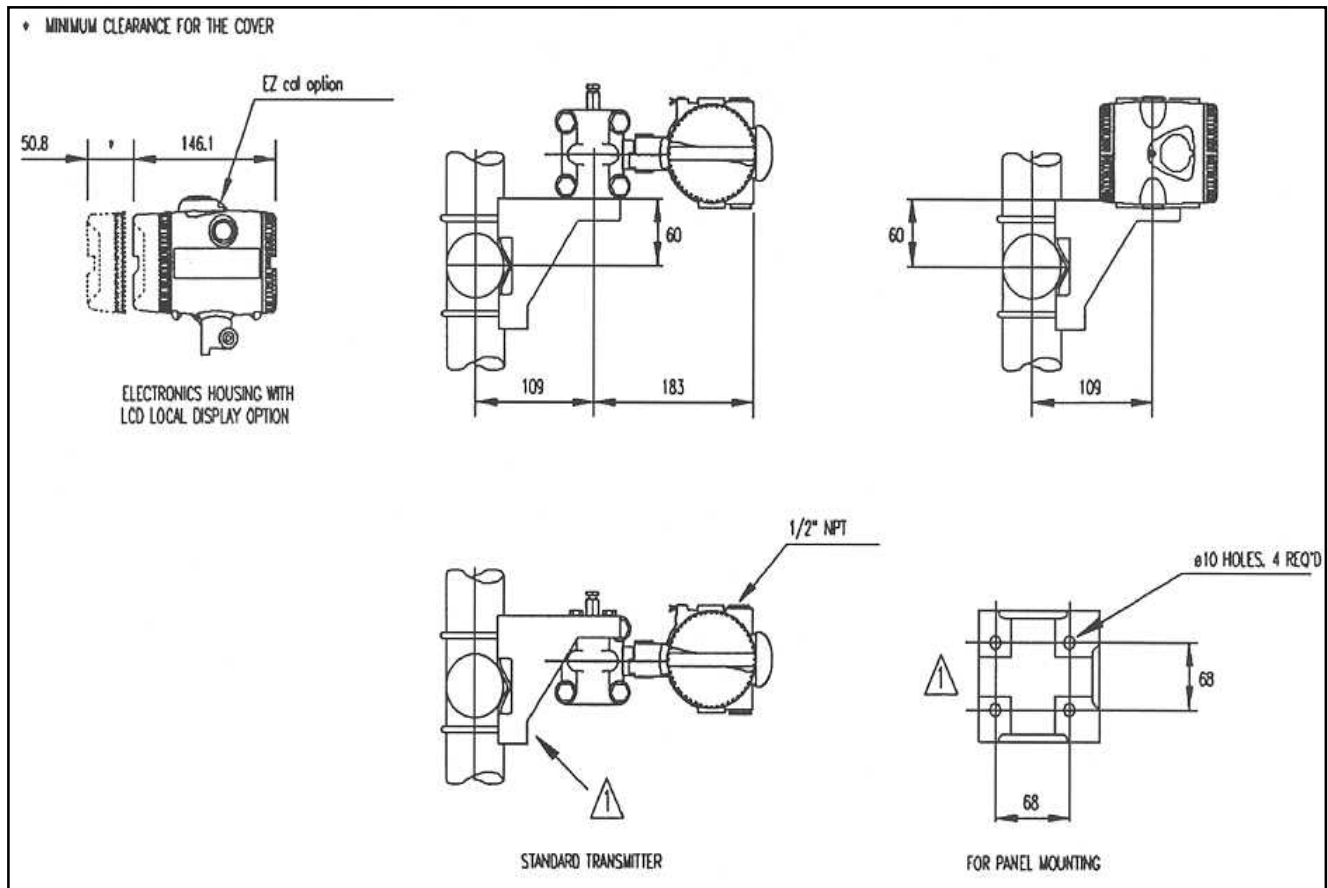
External and Mounting Dimensions for Type PTSDA, PTSDD and PTSDG Pressure Transmitters with L-shape mounting bracket
